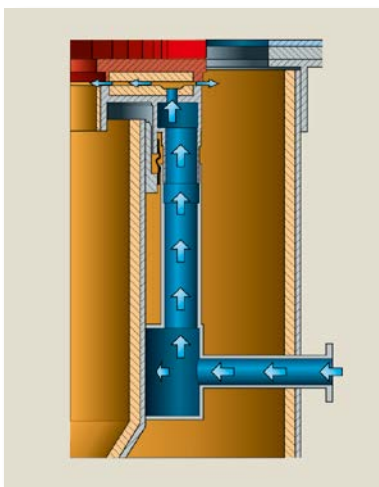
View of the wear-free seal between rotating cage and adjusting ring
